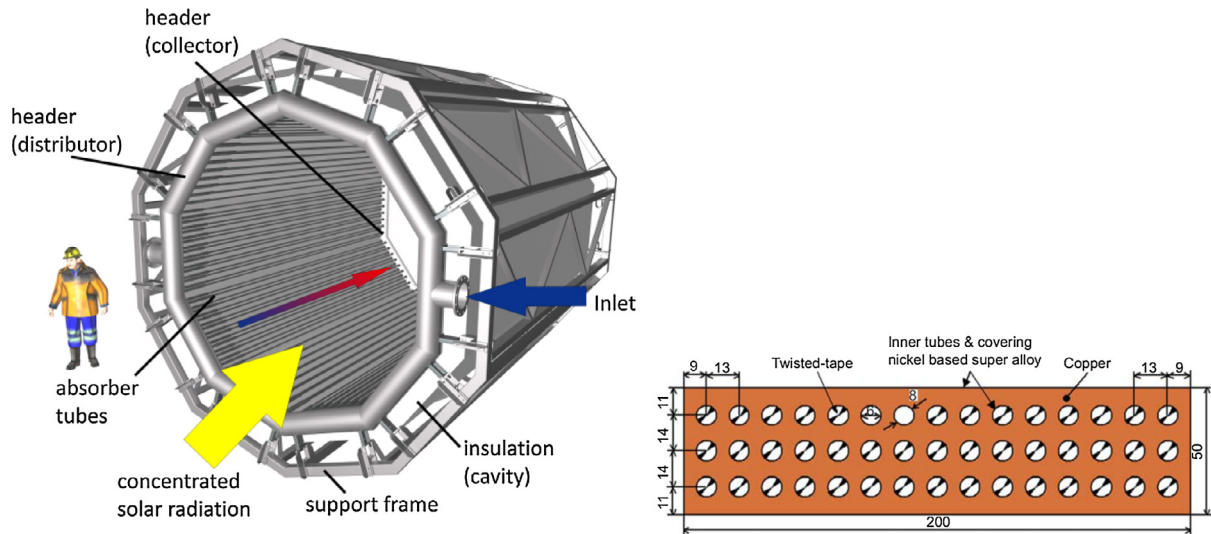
SOLUGAS tube receiver (left); PEGASE embedded tube receiver (right).
